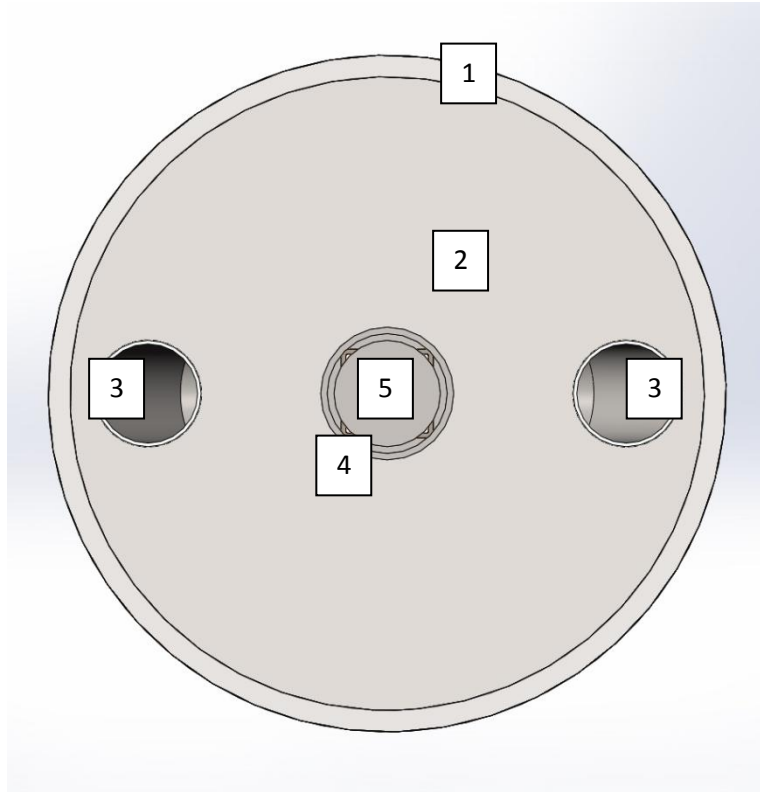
Cross sectional view of the target service pipe. Nomenclature used in this report: [1] Target servicing pipe (nests inside the target insertion shaft); [2] Granular shielding; [3] Helium supply and return pipes; [4] Target access pipe (helium containment boundary); [5] Target insertion rod.
